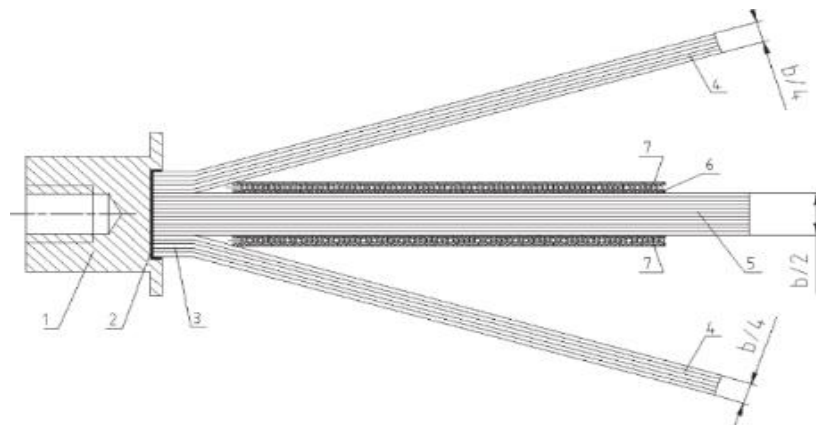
Scheme of dividing the magnetic core package into separate rods.
